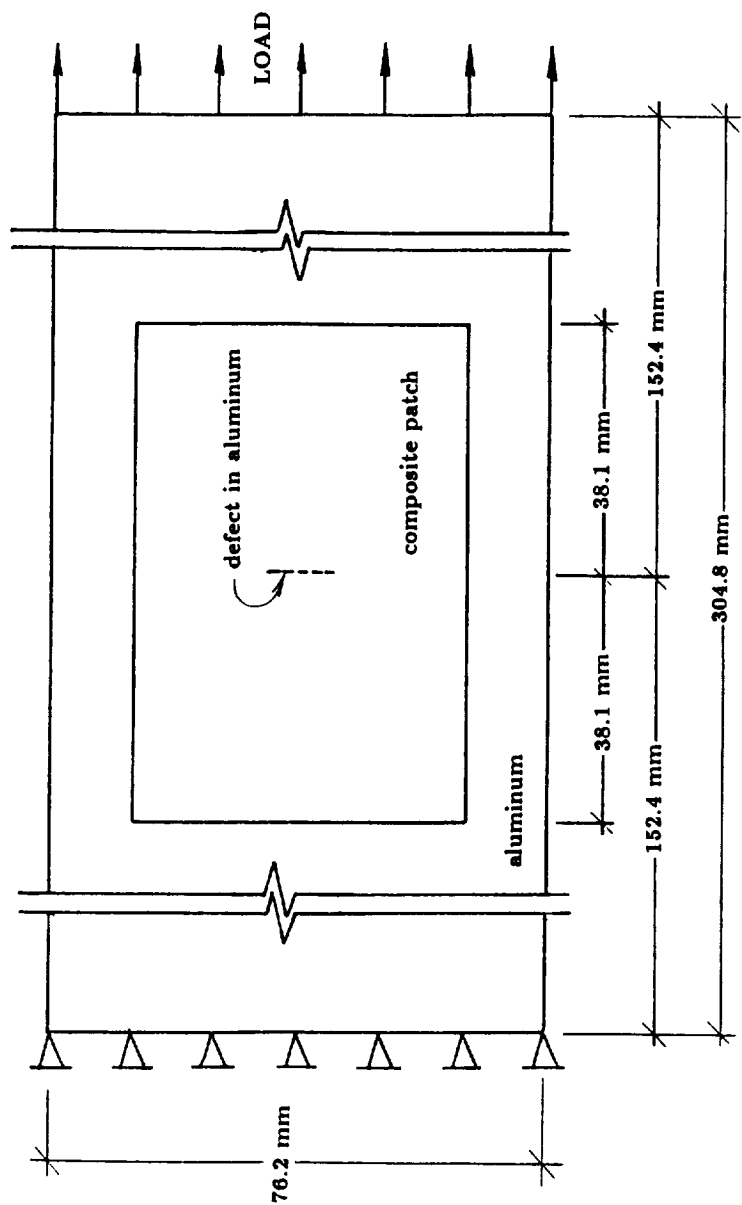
Composite patch repaired aluminum. Aluminum thickness = 3.05 mm (0.12 in.); composite patch thickness = 1.6 mm (0.063 in.) defect in aluminum is transverse to tensile load, defect lengths considered: 2.54, 7.62, and 12.7 mm (0.1, 0.3, and 0.5 in.).
